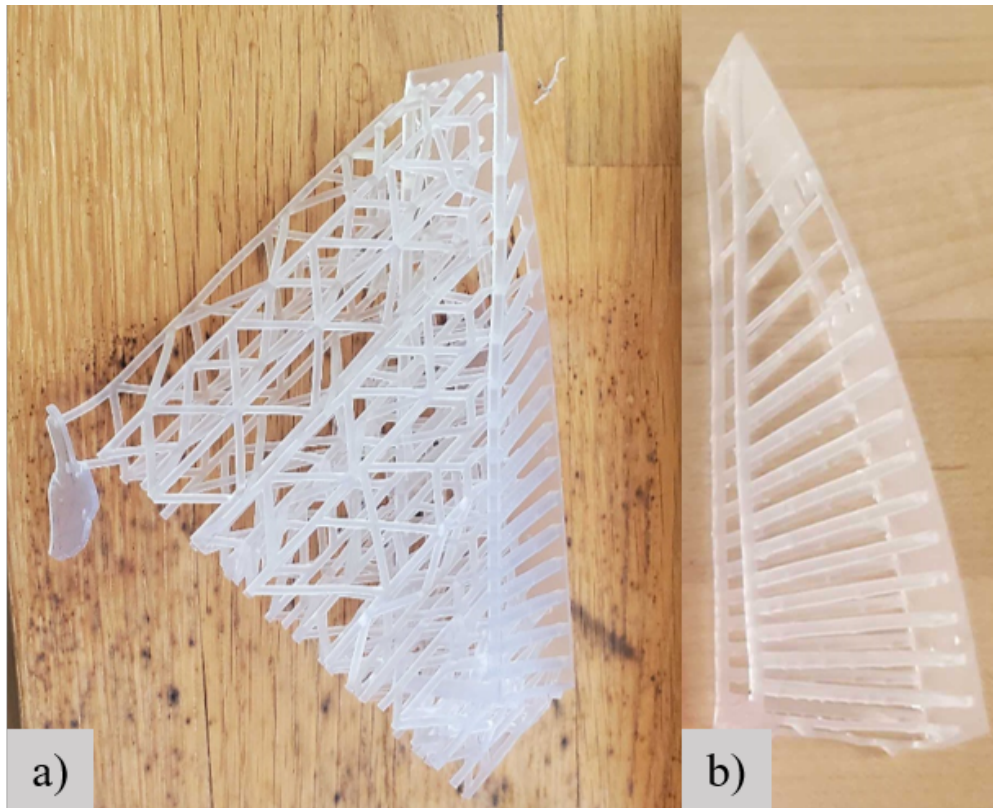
The SLA printed hollow Fin Ray. a) shows the 3D printed Fin Ray right off of the printer and b) shows the resulting post-processed Fin Ray structure.
